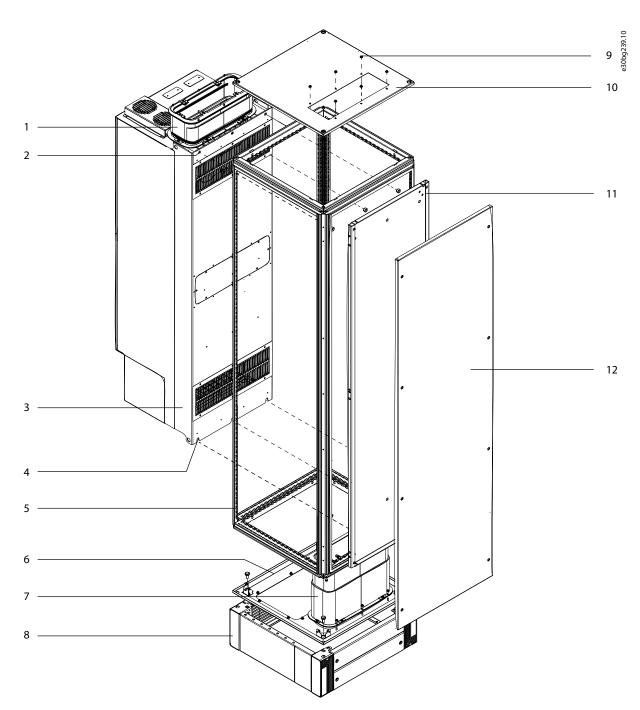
Installation of the Frequency Converter, Mounting Plate, Backplate, and Top Plate
